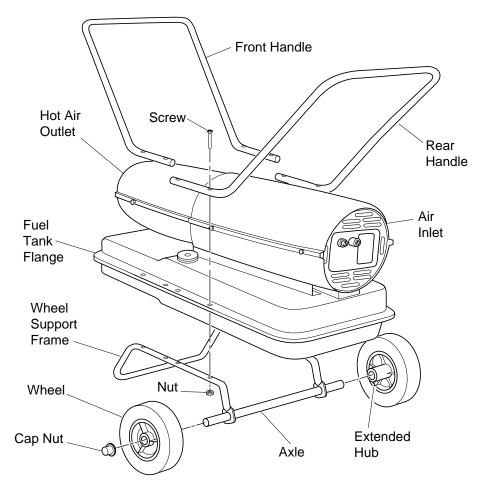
Wheel and Handle Assembly, 90/150,000 BTU/Hr Models Only
